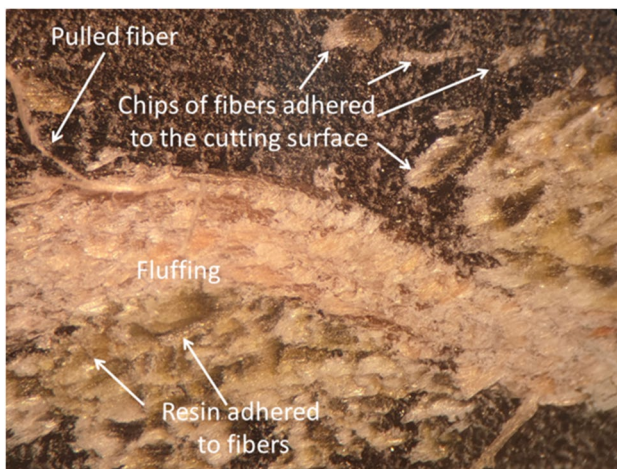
Image of the machining defects encountered during trimming Alfa fibers composite
